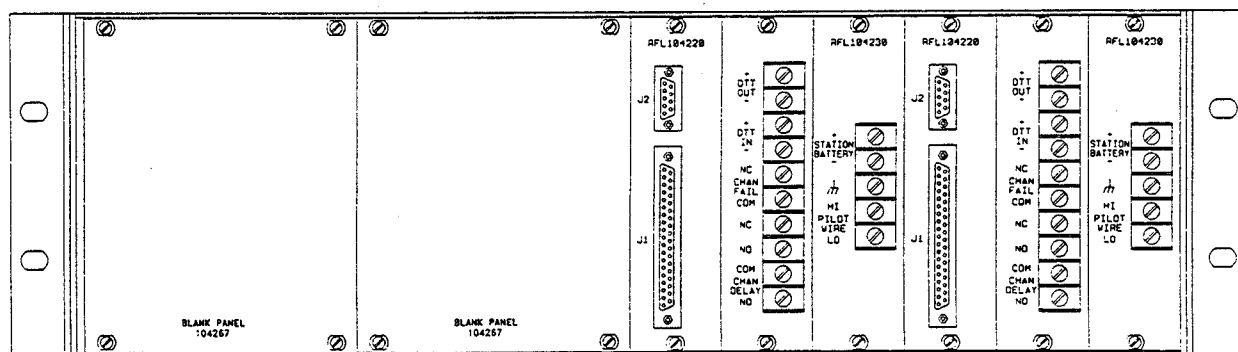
RFL 9720 unit mounted in a panel-mount chassis
